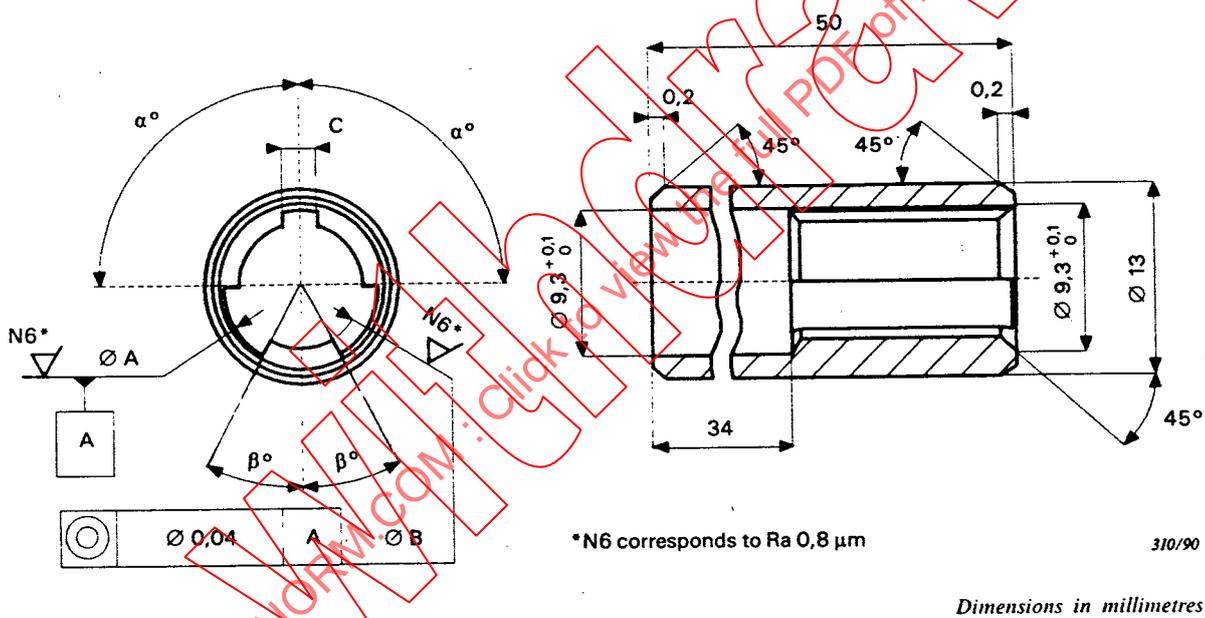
Gauge dimensions for plug interface (see also table 3)
